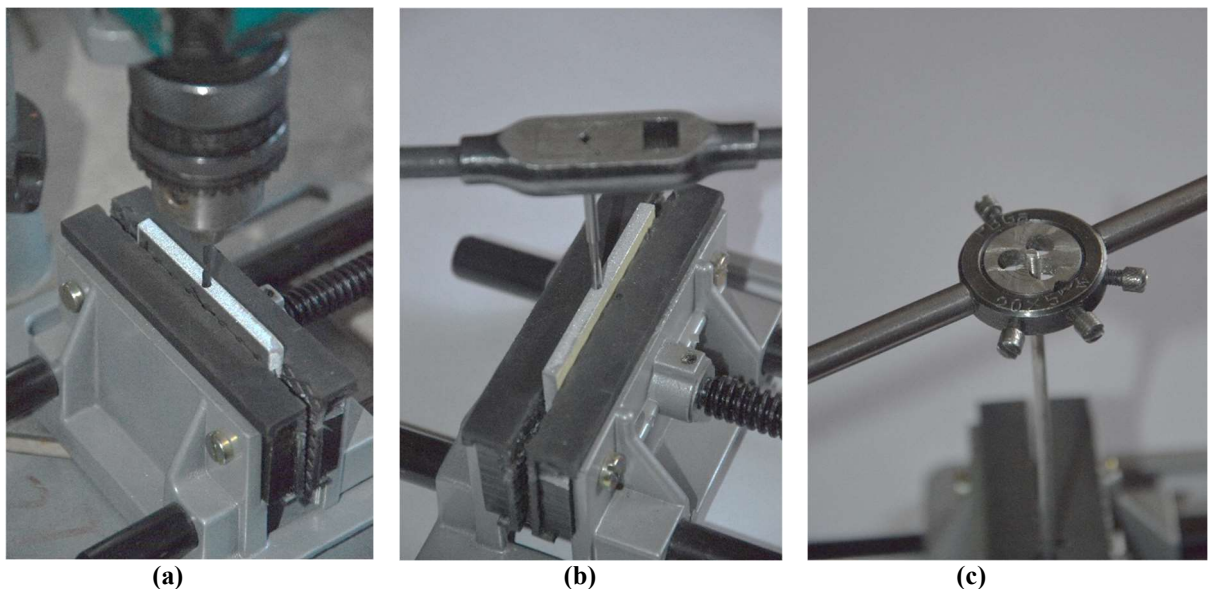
Drilling of sample (a), threading of sample (b), threading of rod (c)
